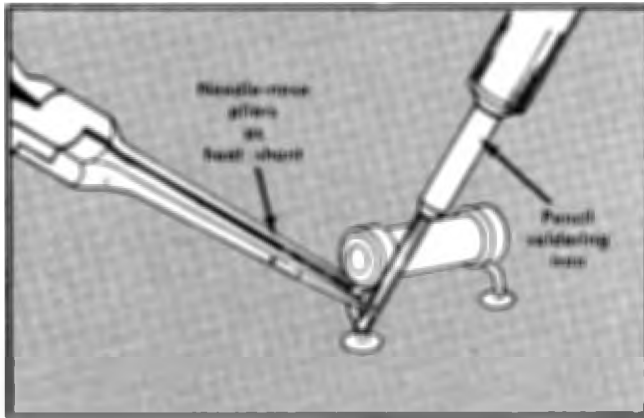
Apply the soldering iron to the heat-shunted lead when removing a component from a circuit card.
